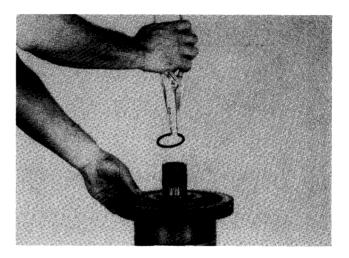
If idler shaft, idler gear or rear bearing are to be replaced, remove bearing and gear. Turn shaft over and remove the front bearing retainer ring and bearing.
